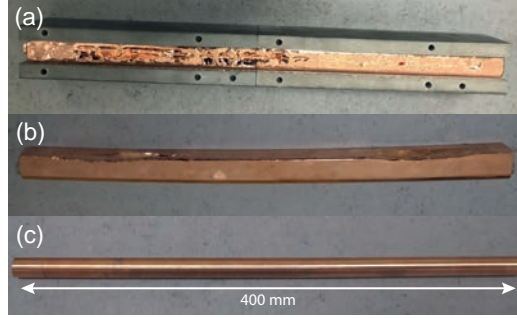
Fabrication steps of medium-scale W fibre-reinforced Cu heat sink pipe specimen with a length of ca. 400 mm. (a) shows the Cu infiltrated W fibre braiding in mould after the casting. (b) shows the cast without mould. Cooling leads to deformation. In (c) the machined pipe is shown (outer diameter 15 mm, wall thickness 1.5 mm).
